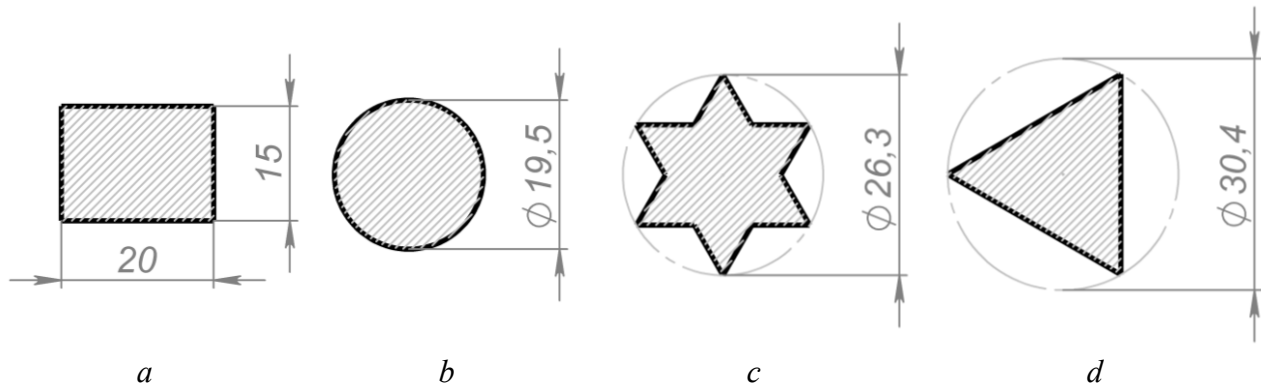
Schematic sections of blades with the same area of 300 mm², and their dimensions, where: a - rectangular blade, b - round blade, c - star-shaped blade, d - triangular blade.
